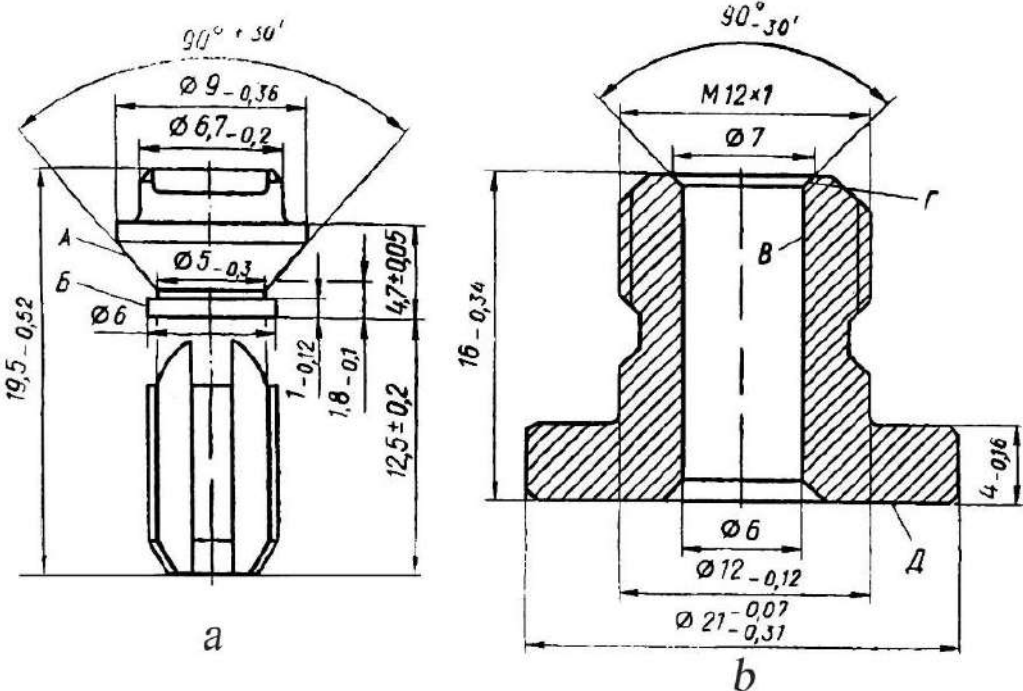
Pressure valve of pumps of 4TH–8,5×1 type: *a* – valve *b* – seat; *A* – shut-off valve cone; *B* – unloading belt; *B* – guide valve seat surface to which unloading belt abuts; *Γ* – facet to which shut-off cone abuts; *Δ* – butt-end to which plunger bushing abuts
